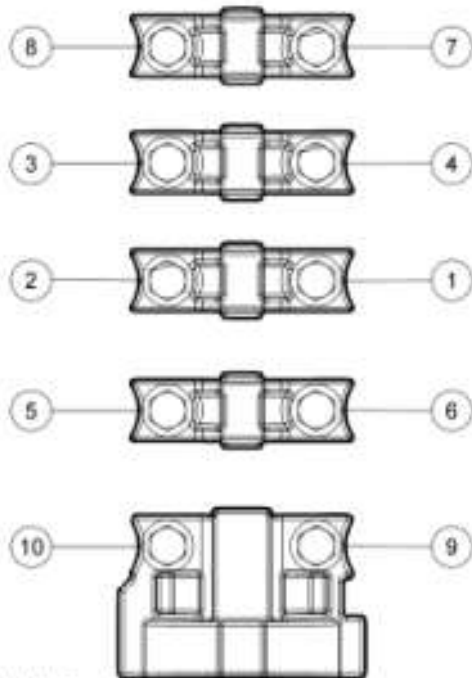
Identifying Camshaft Bearing Cap Bolt In Sequence
